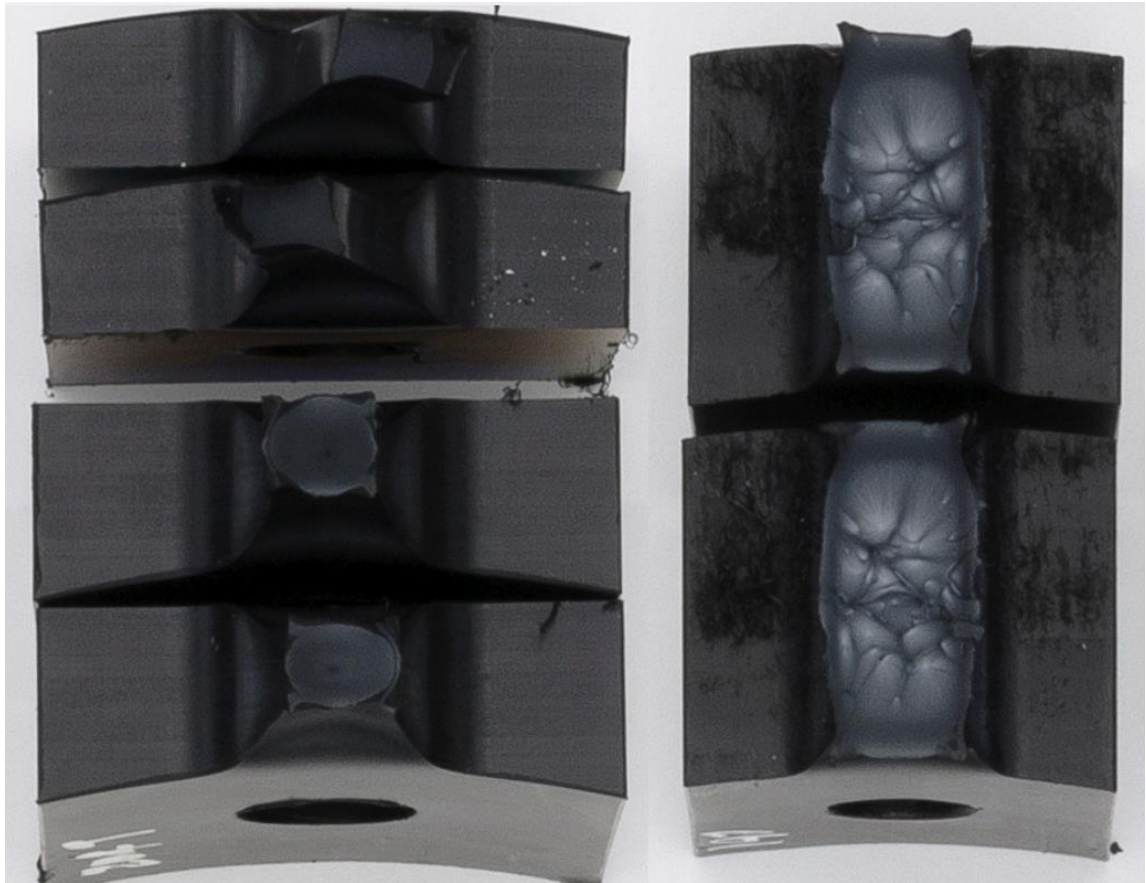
, Fracture surface for parent modified specimen on the left (PEB204) and parent standard specimen on the right (PEB197) from 500mm OD pipe
